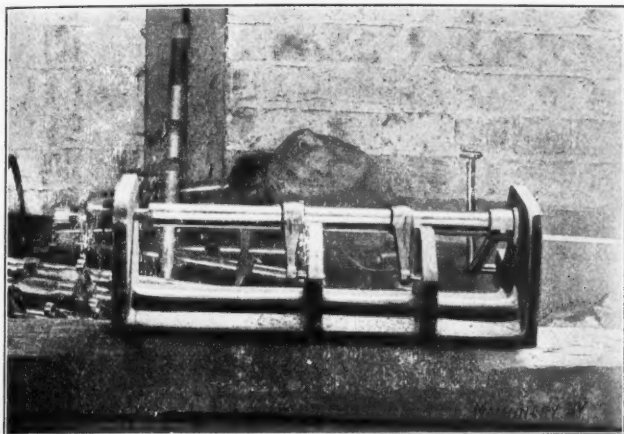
Jig in which Foot-lever Pin-holes are drilled
